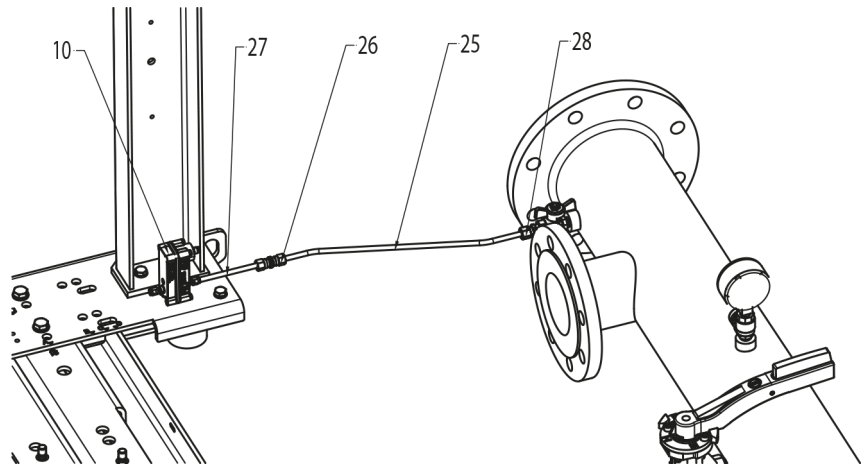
Connection between the discharge manifold and pressure measurement converter
